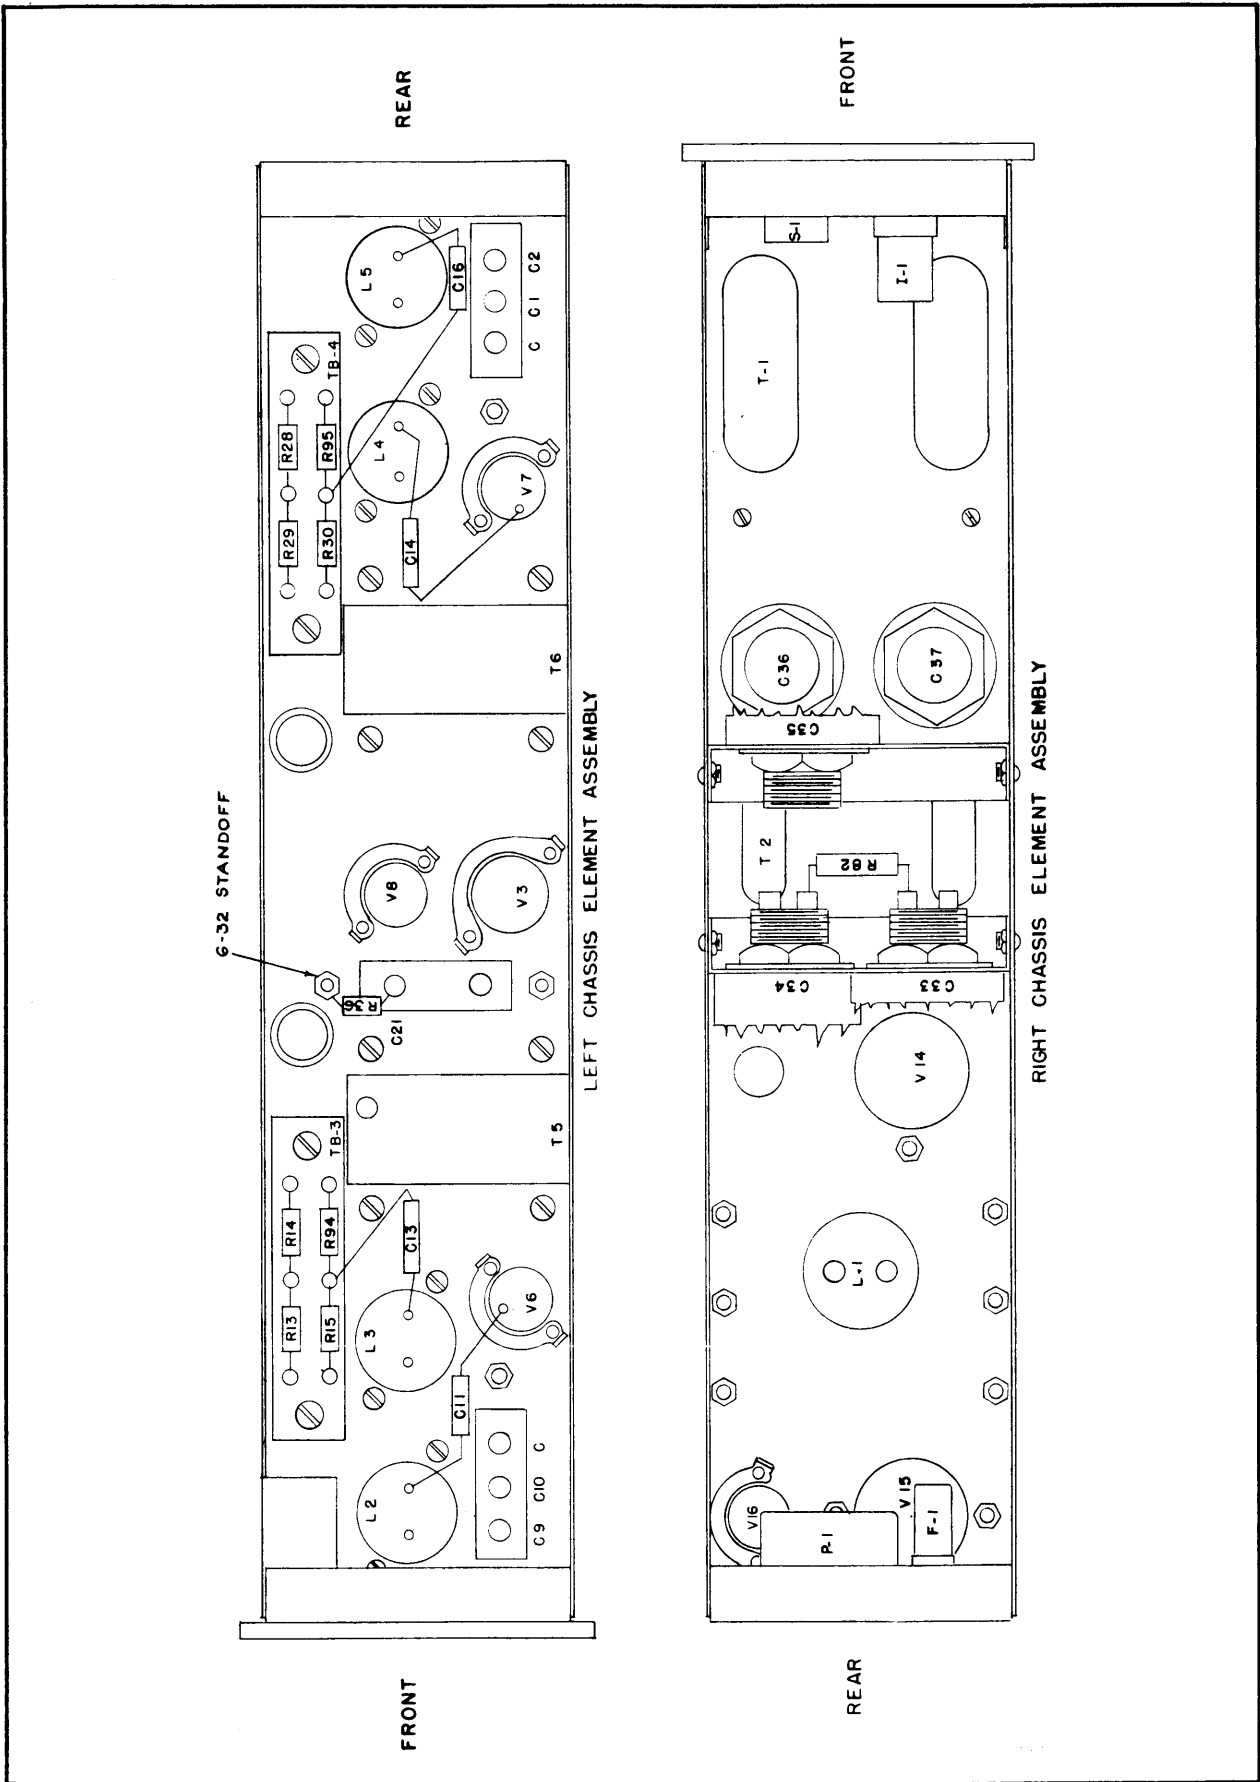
Component Layout-Left & Right Views. Model CFA-\
